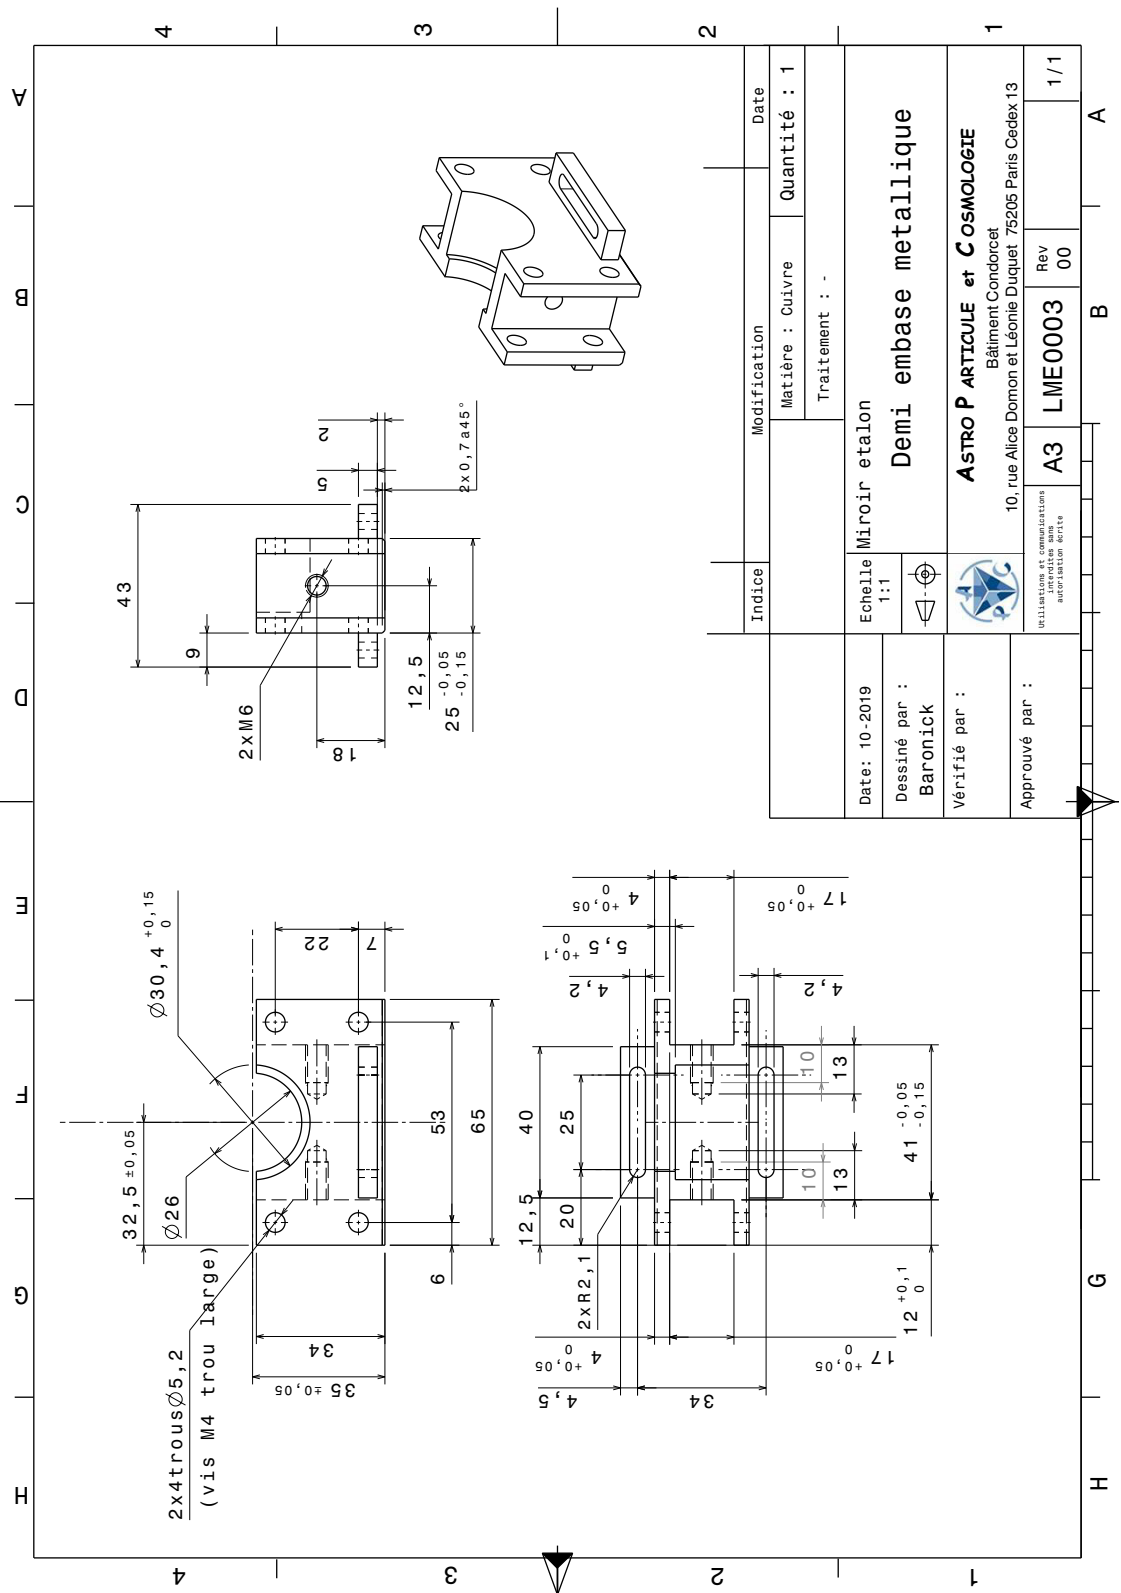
Mechanical drawing of the bottom part of the etalon holder, by Jean-Pierre Baronick.
